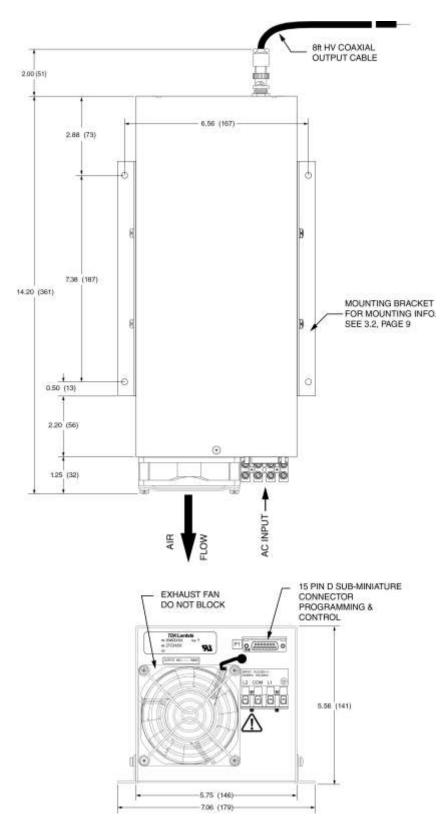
Mechanical Dimensions for 500A, 102A, 152A Outputs up to 6kV (for grounding instructions see SECTION 3.6)
